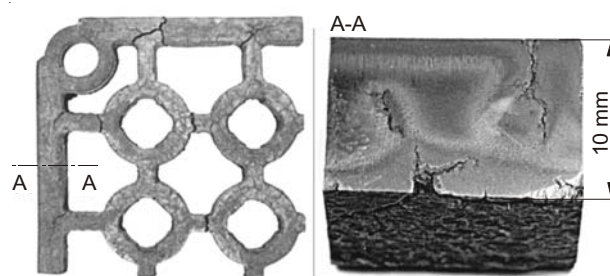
Casting of pallet taken out of service from carburizing furnace:
